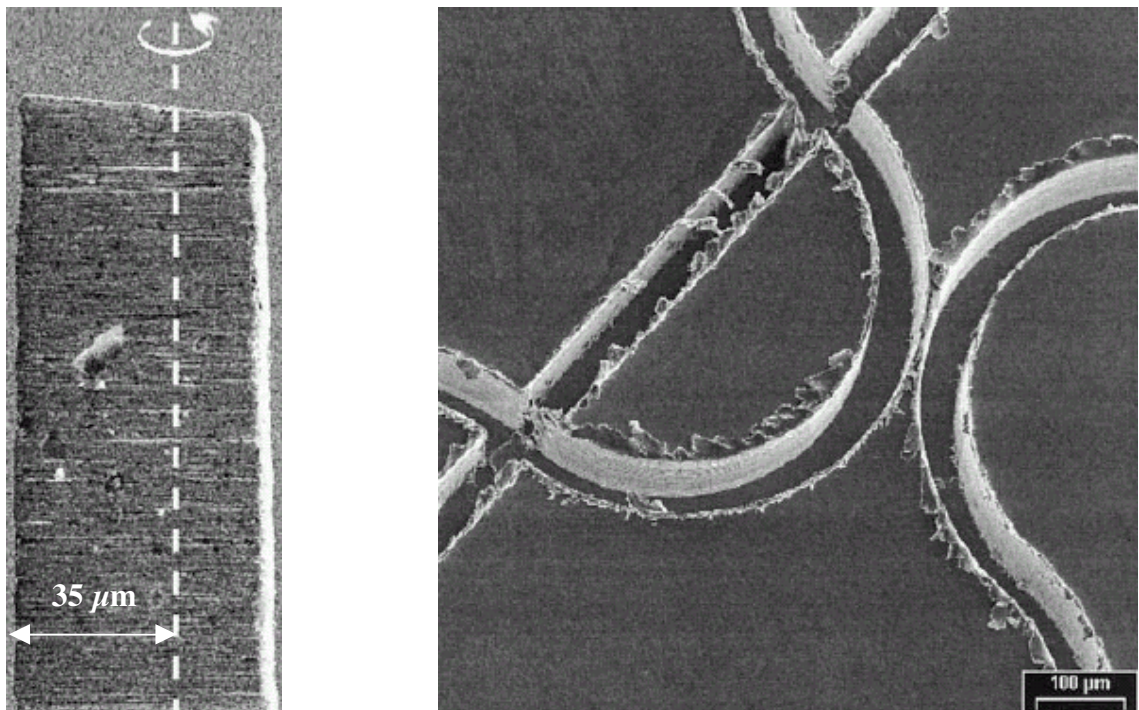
Custom-ground Carbide Tool and Grooves Machined in Brass
